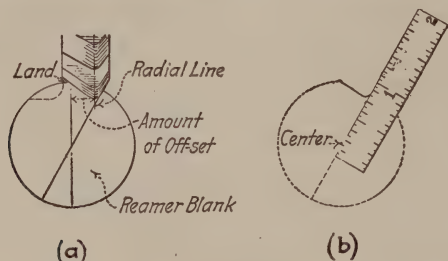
(a) Setting reamer cutter. A radius is a straight line drawn from the center to the circumference. A radial tooth face will split the radial line. (b) Checking radial face of tooth.
